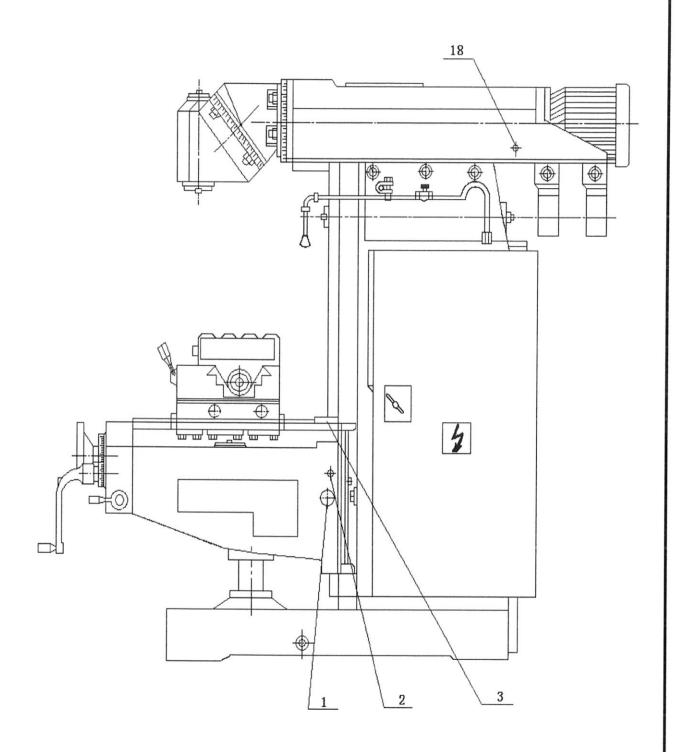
Right view of lubrication position of Universal rotary-head milling machine
